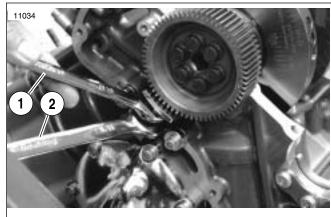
Install Small Plate of Tool to Water Pump Side of Engine
